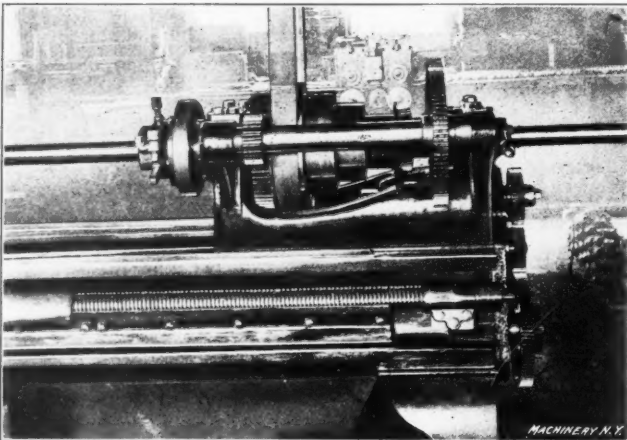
Rear View of Lead-screw Lathe showing Master Lead-screw
